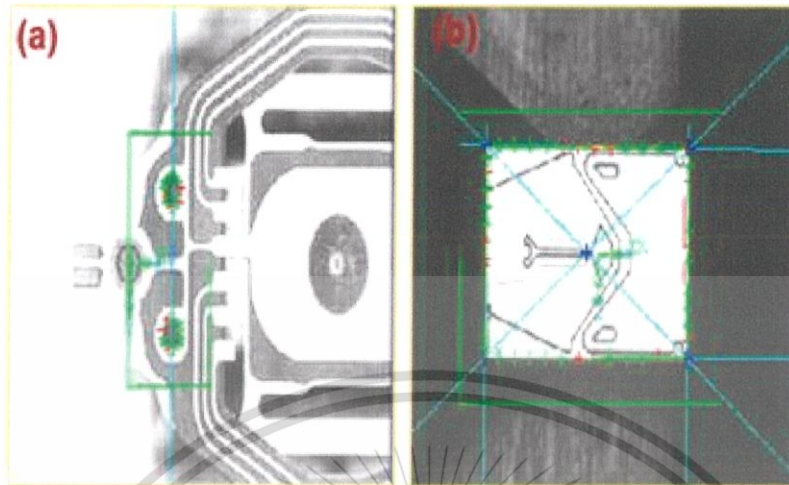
Vision recognition of slider attach machine for placing slider into suspension (a) Suspension recognition and (b) slider recognition [2]
